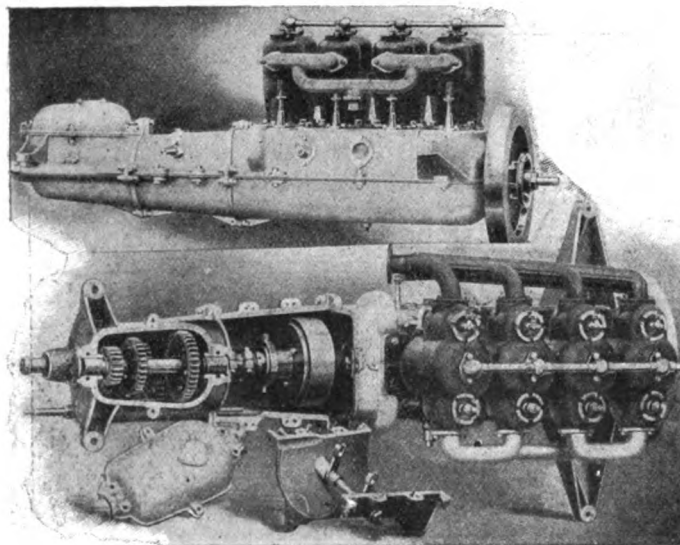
Two Views of the Combined Engine, Clutch and Gear-box on the Buick 24-h.p. Car.
